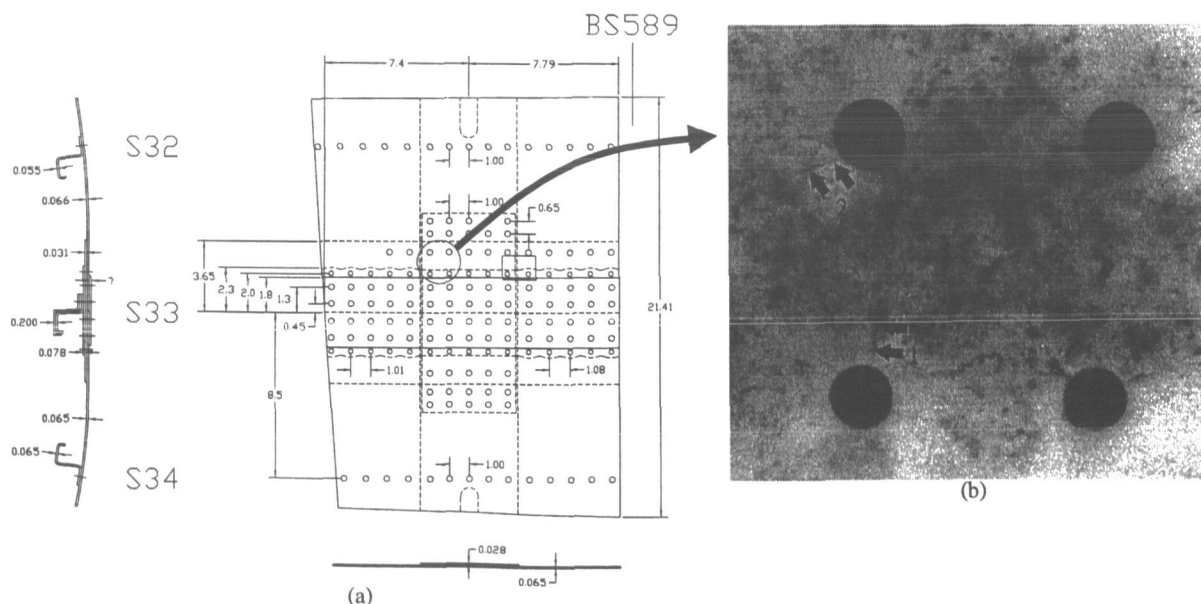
L1011 longitudinal butt joint; a) Schematic showing joint configuration, b) X-ray image showing location of cracks that were pried open.
